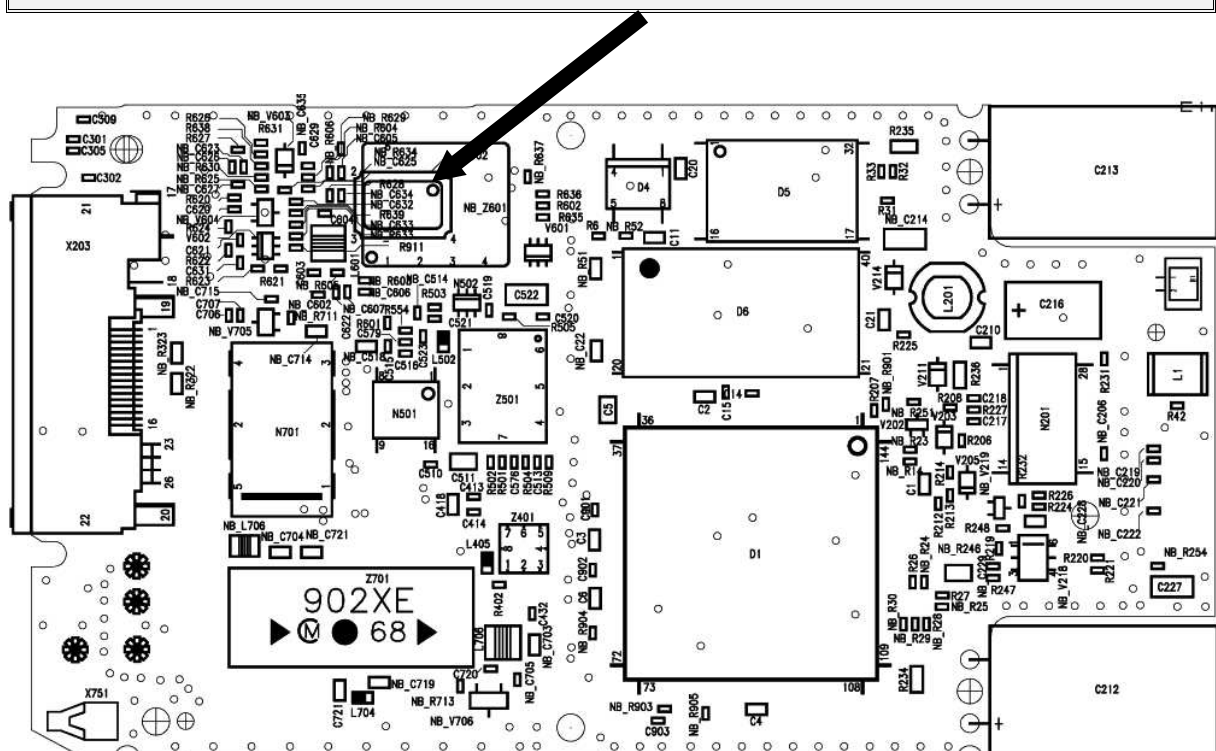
C10 Board 13 MHz Oscillator Side (Top View)
